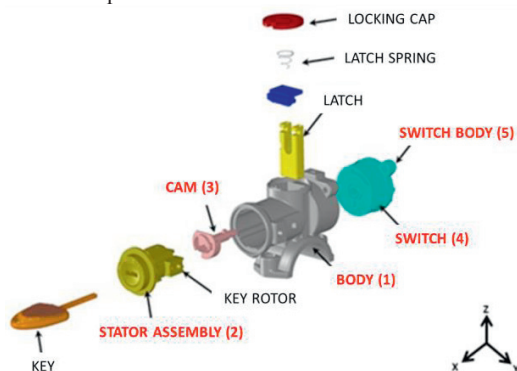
Exploded view of ignition switch with individual parts 1-5
